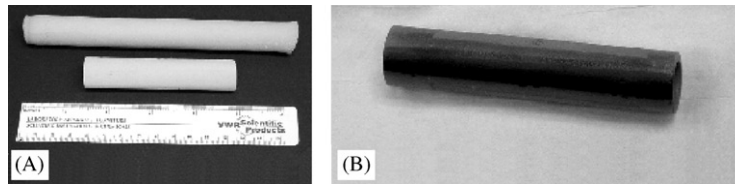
Electrolyzer tubes: (a) green tube after cold isostatic pressing; (b) after completion.
